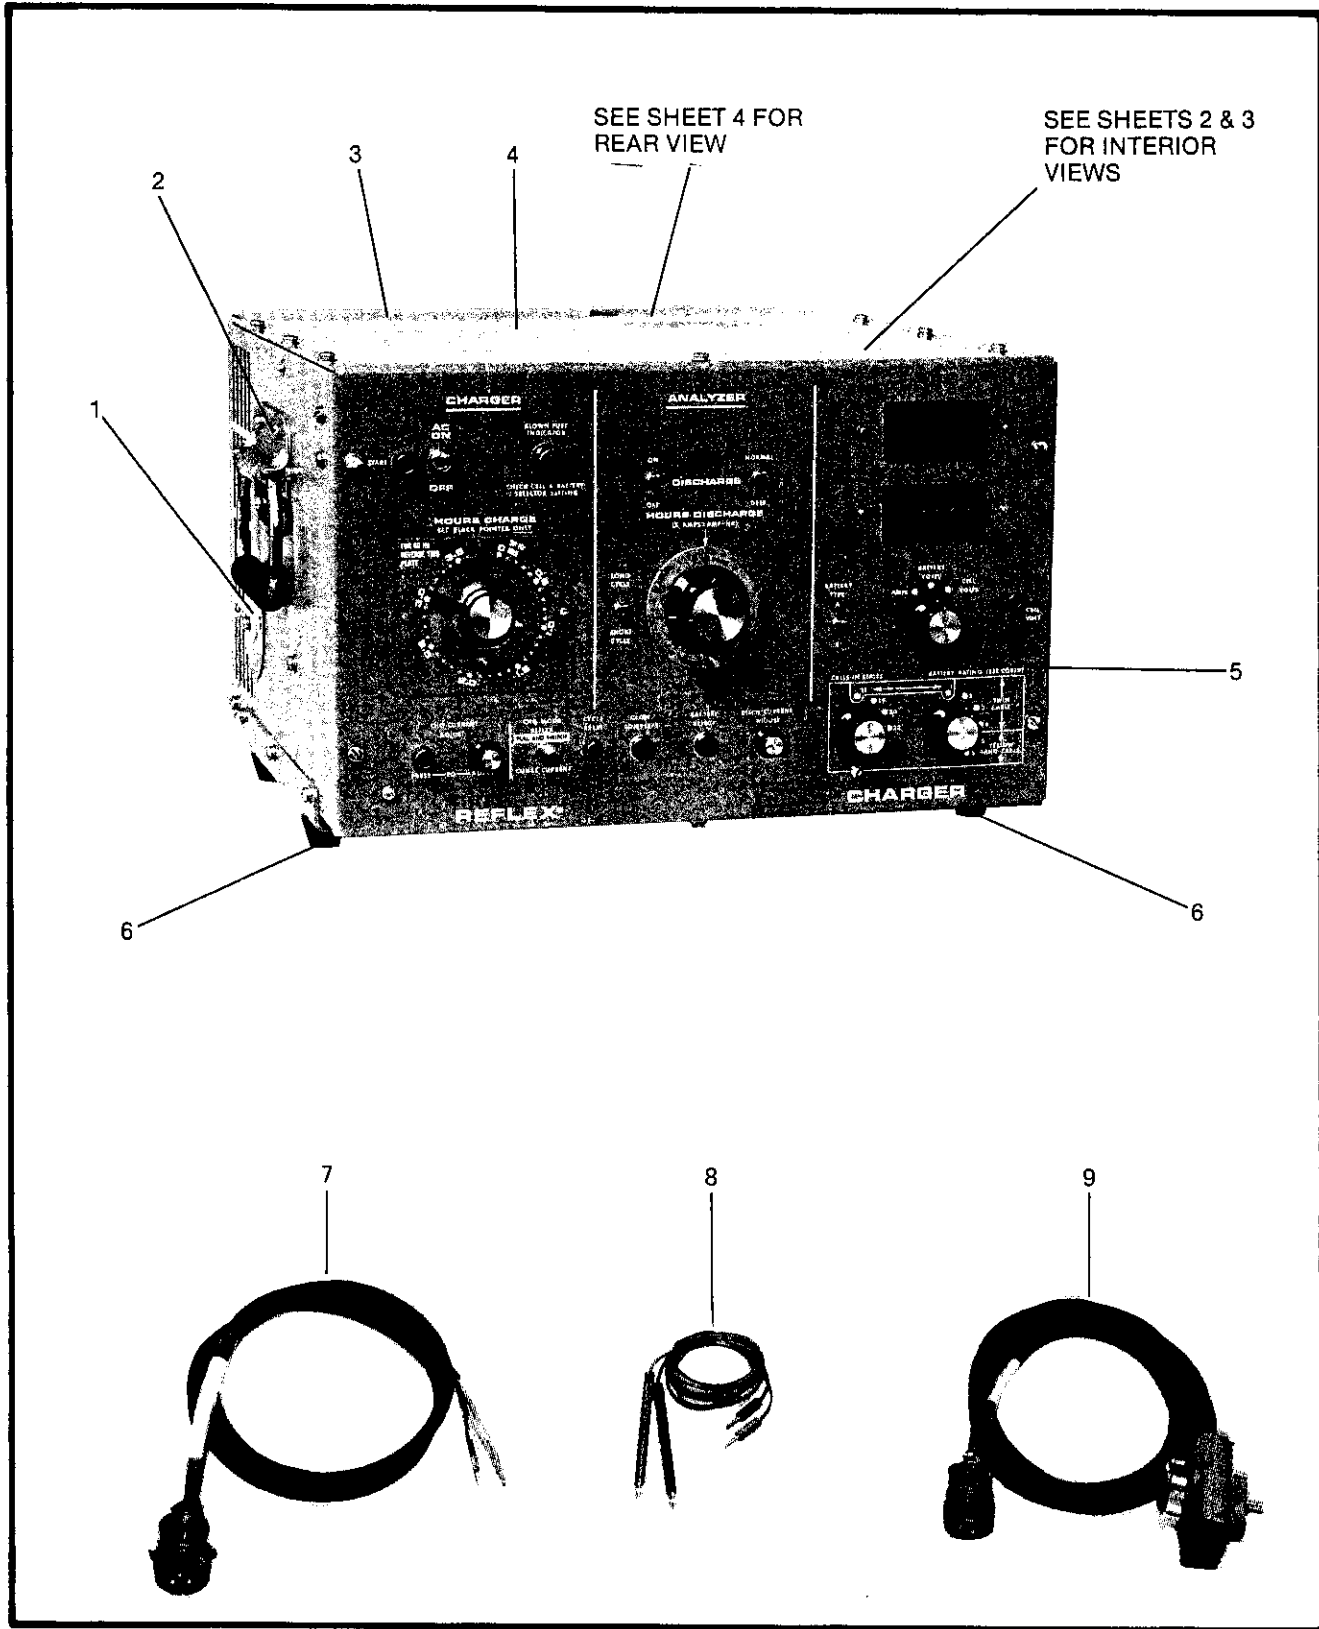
Replaceable Parts-Main Assembly (Sheet 1 of 4)
